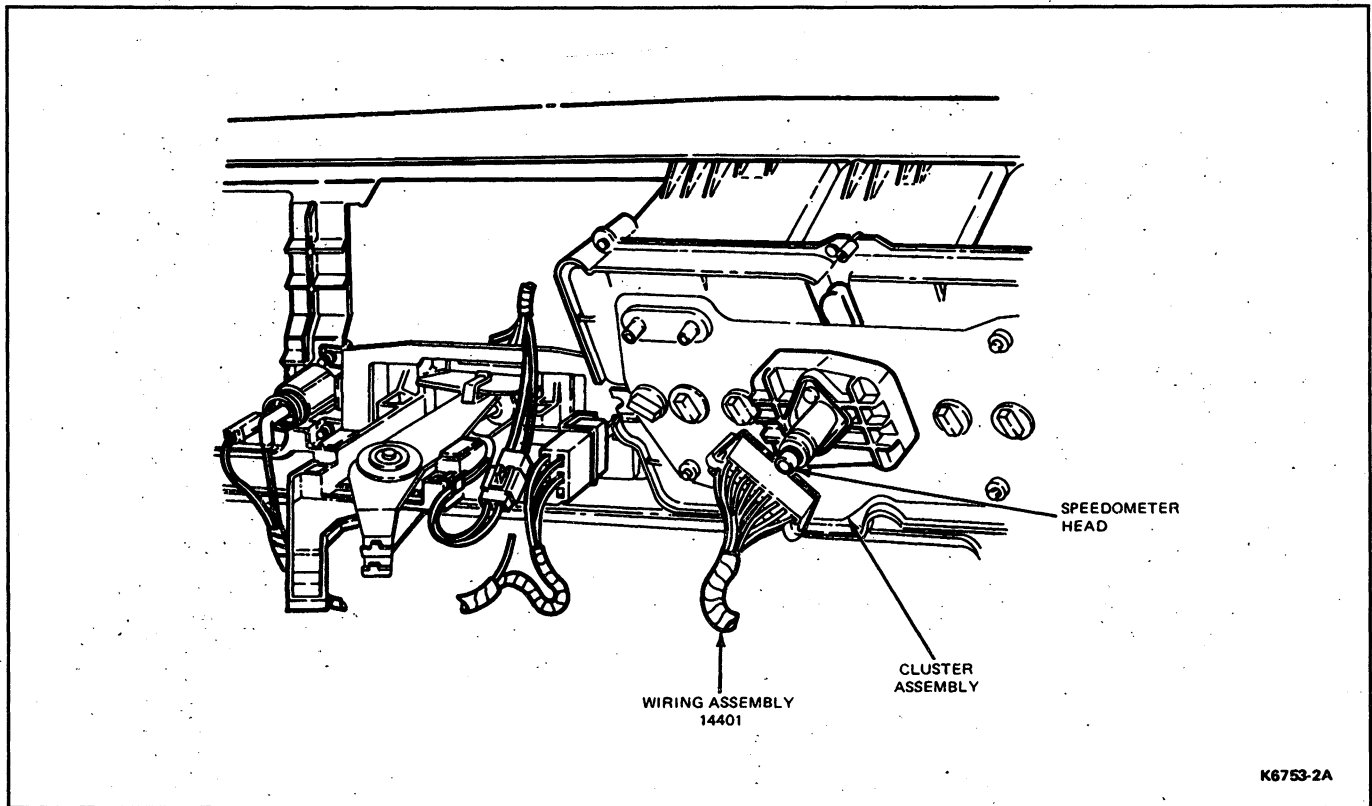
Instrument Cluster Wiring—E-150—E-350
